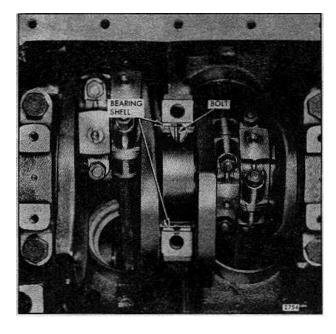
Removing Upper Main Bearing Shell (Except Rear Main)
